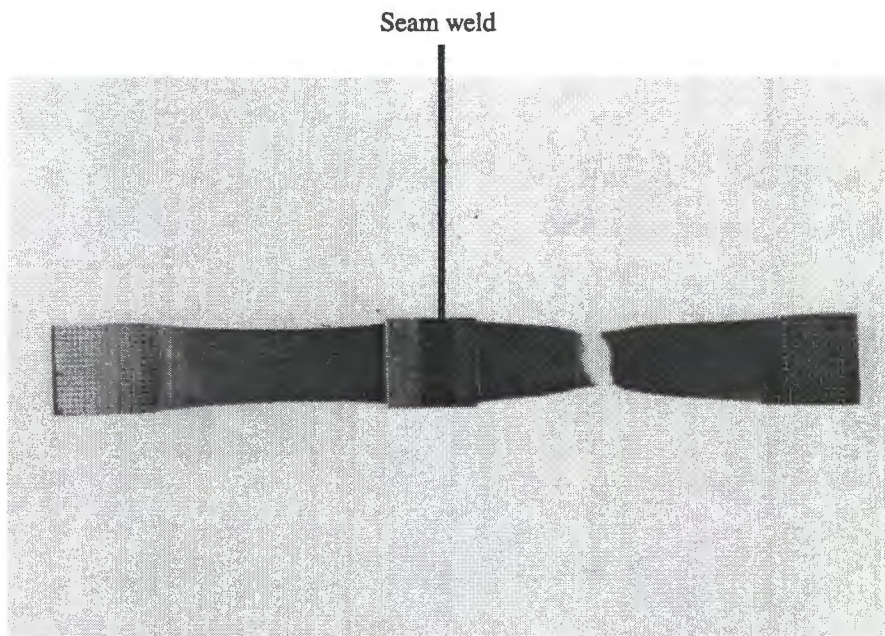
A typical seam weld failure; reduced 50%.
